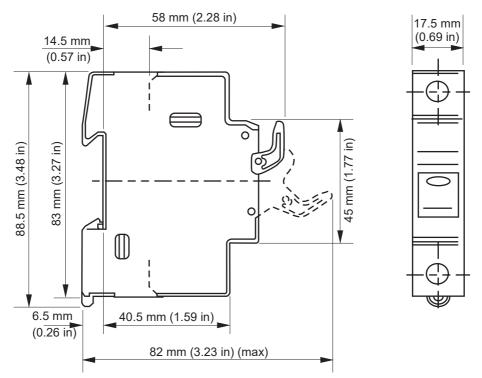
Fuse holder dimensions: US101 (10x38mm)
